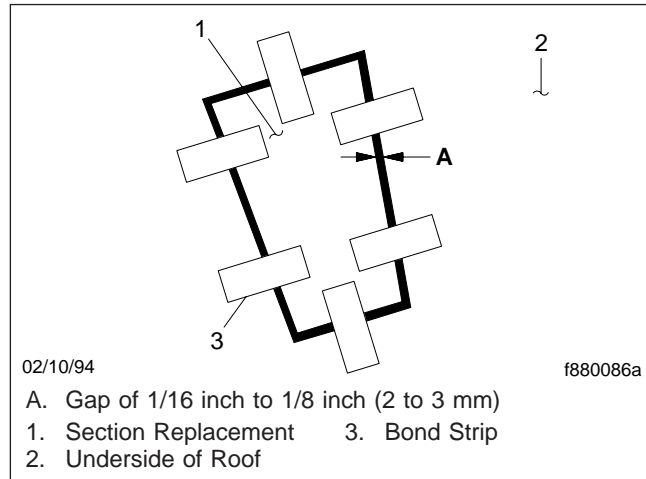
, Securing the Section Replacement to the Roof Panel Using Bond Strips
